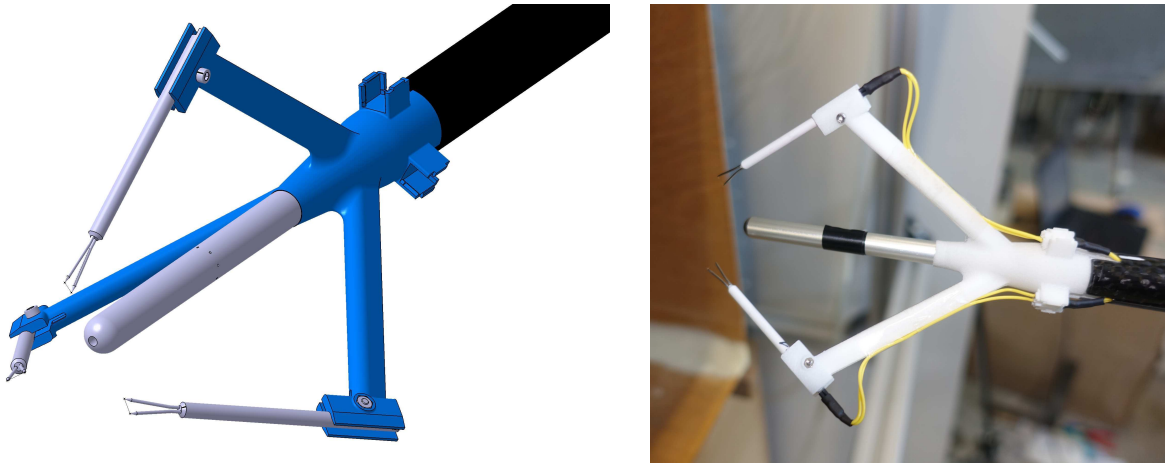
Design of the hot wire adapter. Figure 6.30: Assembled triple hot wire probe.
